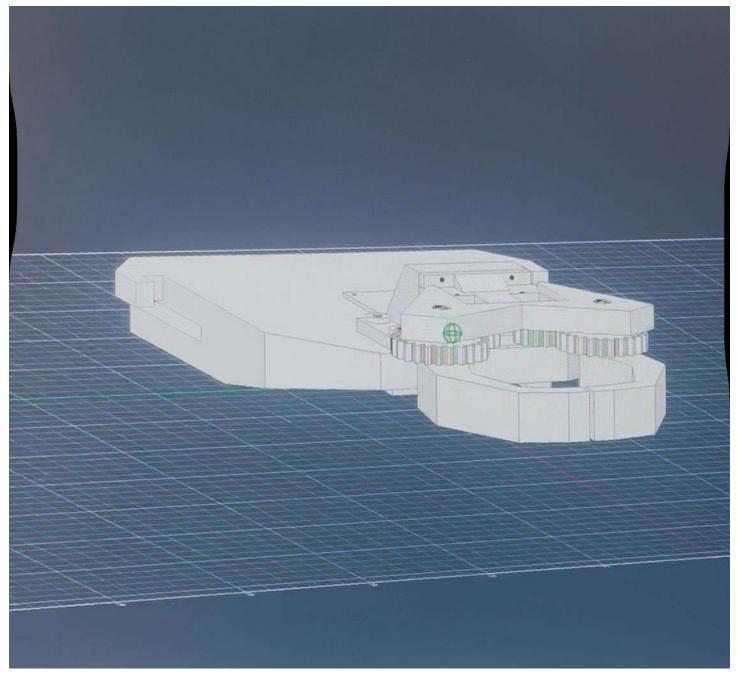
CAD(Fusion 360) Model of Gripper Arm Assembled
